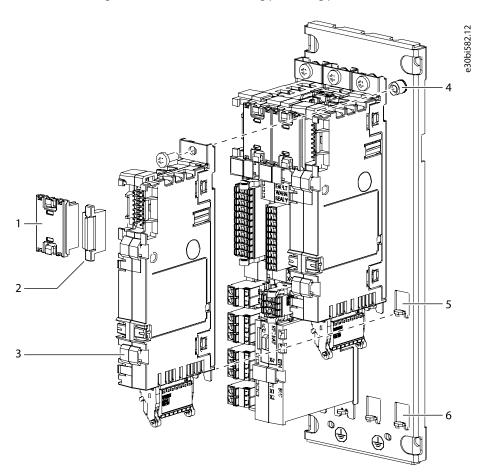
Installing a Board to the Modular Control Unit Mounting Plate
